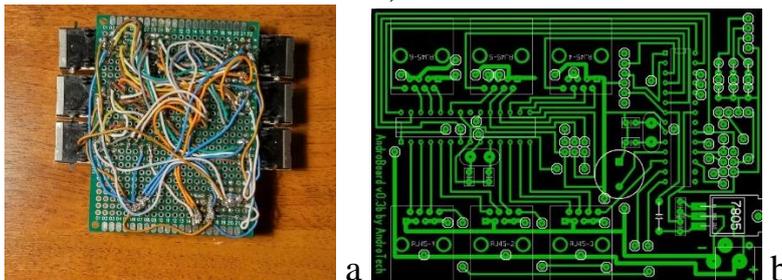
a)The first prototype of the AndroBoard board; b) Prepared board design in Sprint-Layout 5.0
